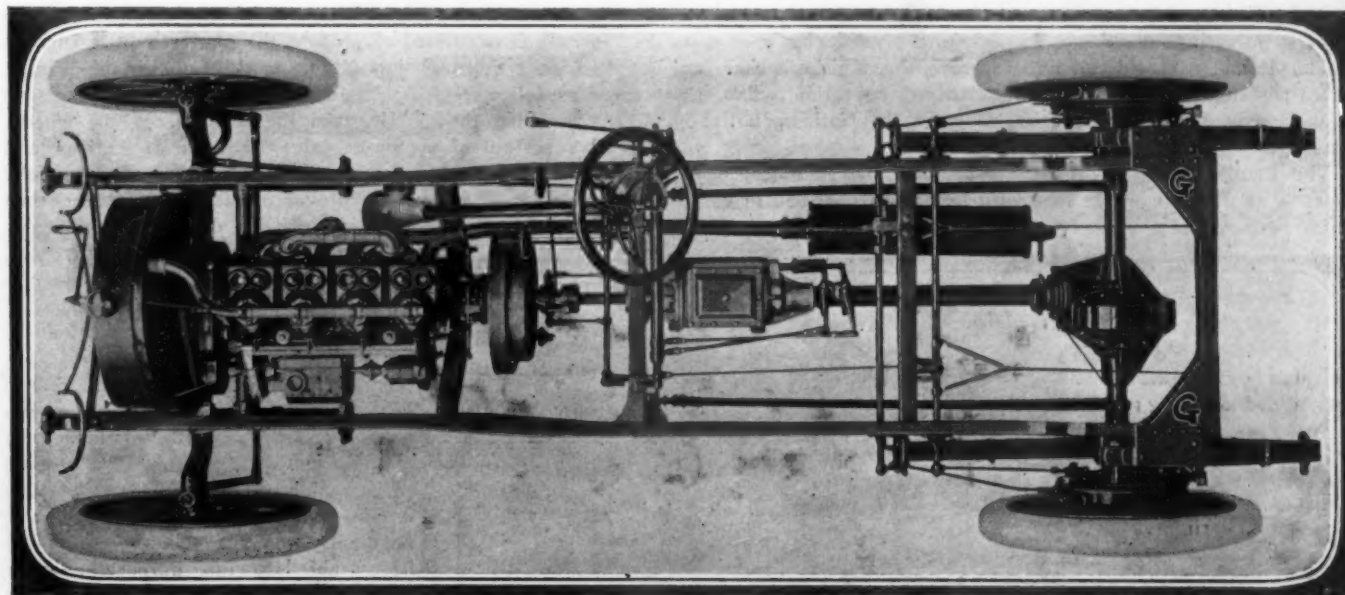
Plan view of the Rambler chassis, showing the co-relation of the various units
